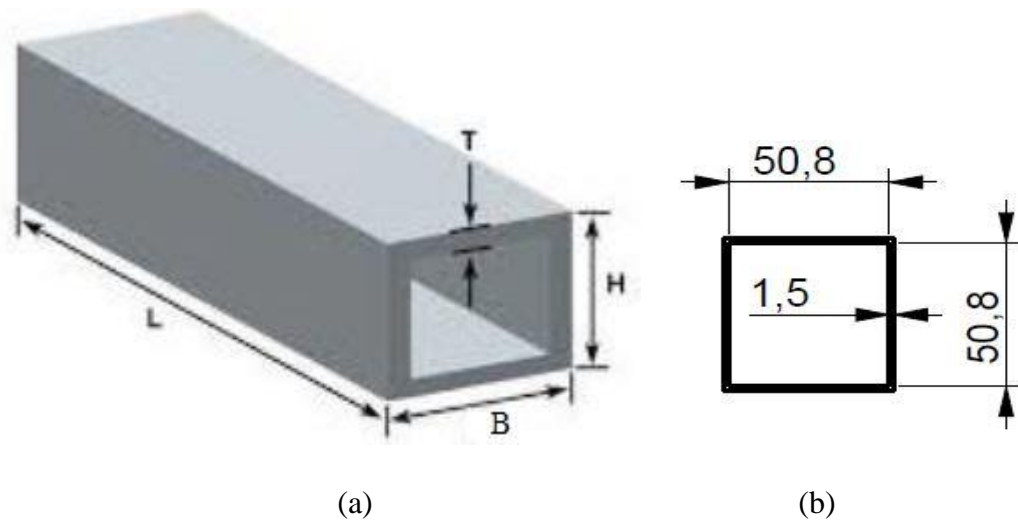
(a) CAD model for support (b) cross sectional view of support
